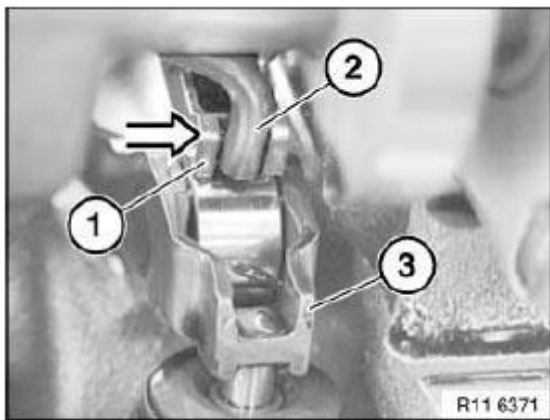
Inserting Torsion Spring On Intermediate Lever
